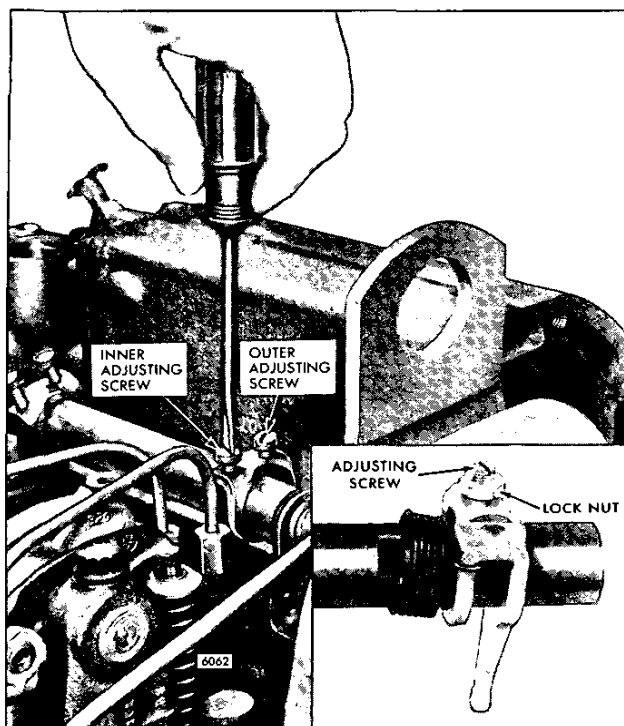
Adjusting Height of Rack Control Lever Adjusting Screws
